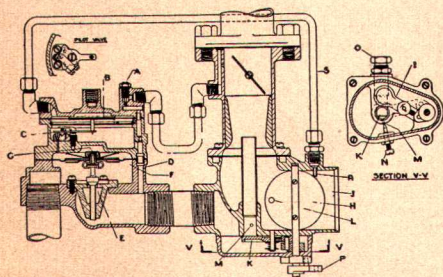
Ensign Gas Carburetor and Fuel Regulator
